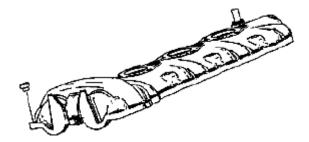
Identifying Special Tool EN 46101 Courtesy of SUZUKI OF AMERICA CORP.
